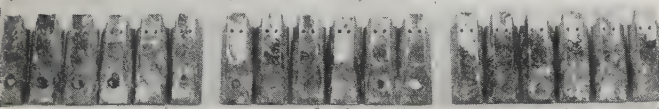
Segments from female contacts of 3 explosion chambers after tests
